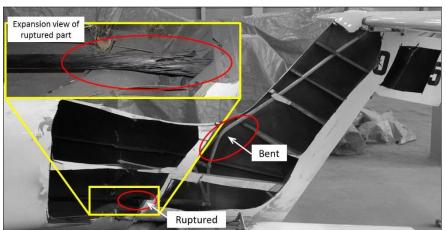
condition of the elevator control rod (photographed after the external plate was cut)
